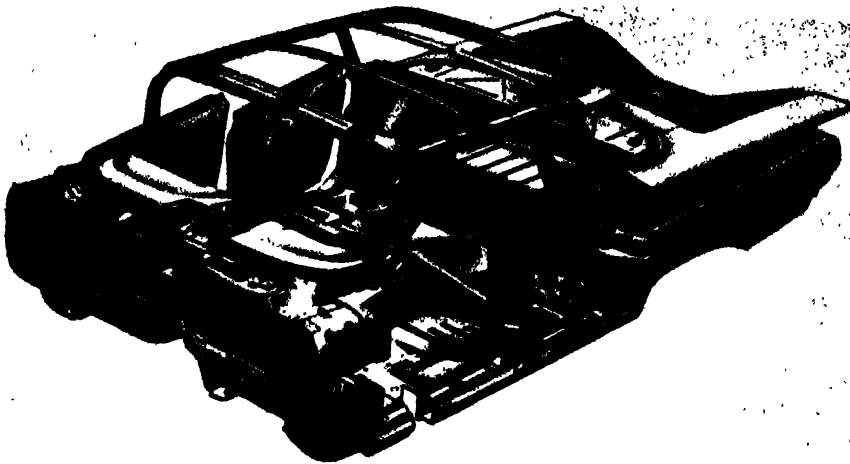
Cutaway view showing conventional construction of an all-steel, welded body for a 4-door sedan. The body is bolted to a frame which carries the engine
